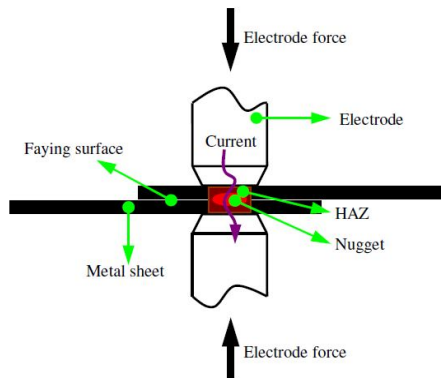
A schematic representation of the resistance spot welding process [2].
